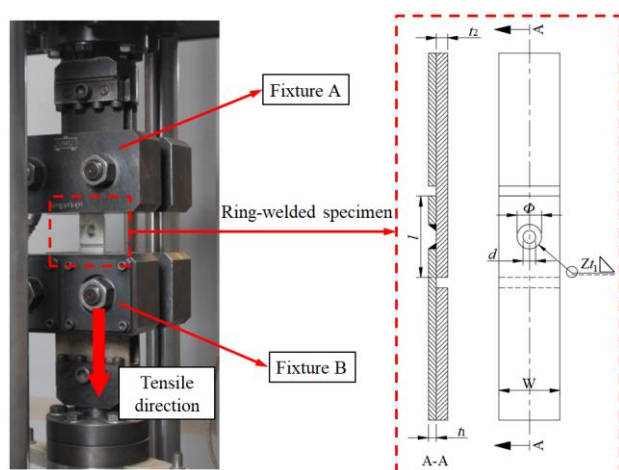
Photograph and schematic of the ring-welded specimen and test fixture.
